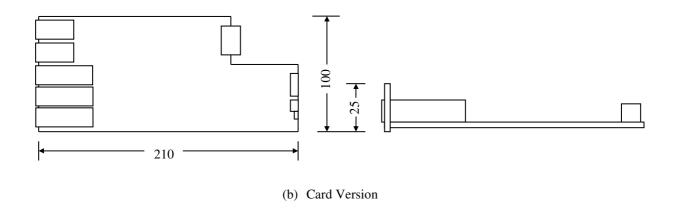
OSD2144A MOUNTING DIMENSIONS
